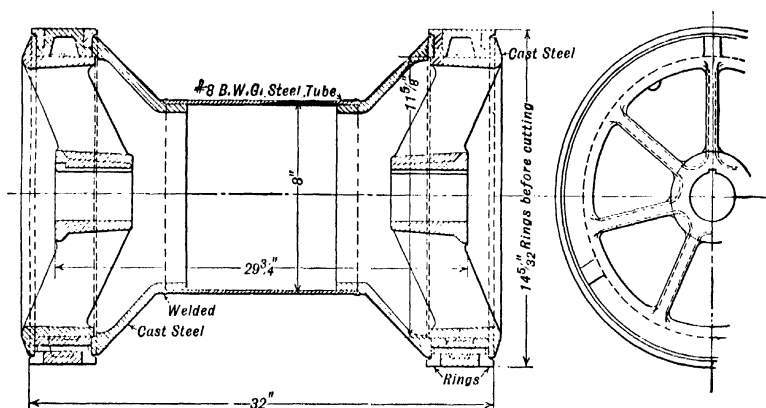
Piston Valve for (4-8-2) Locomotive.
